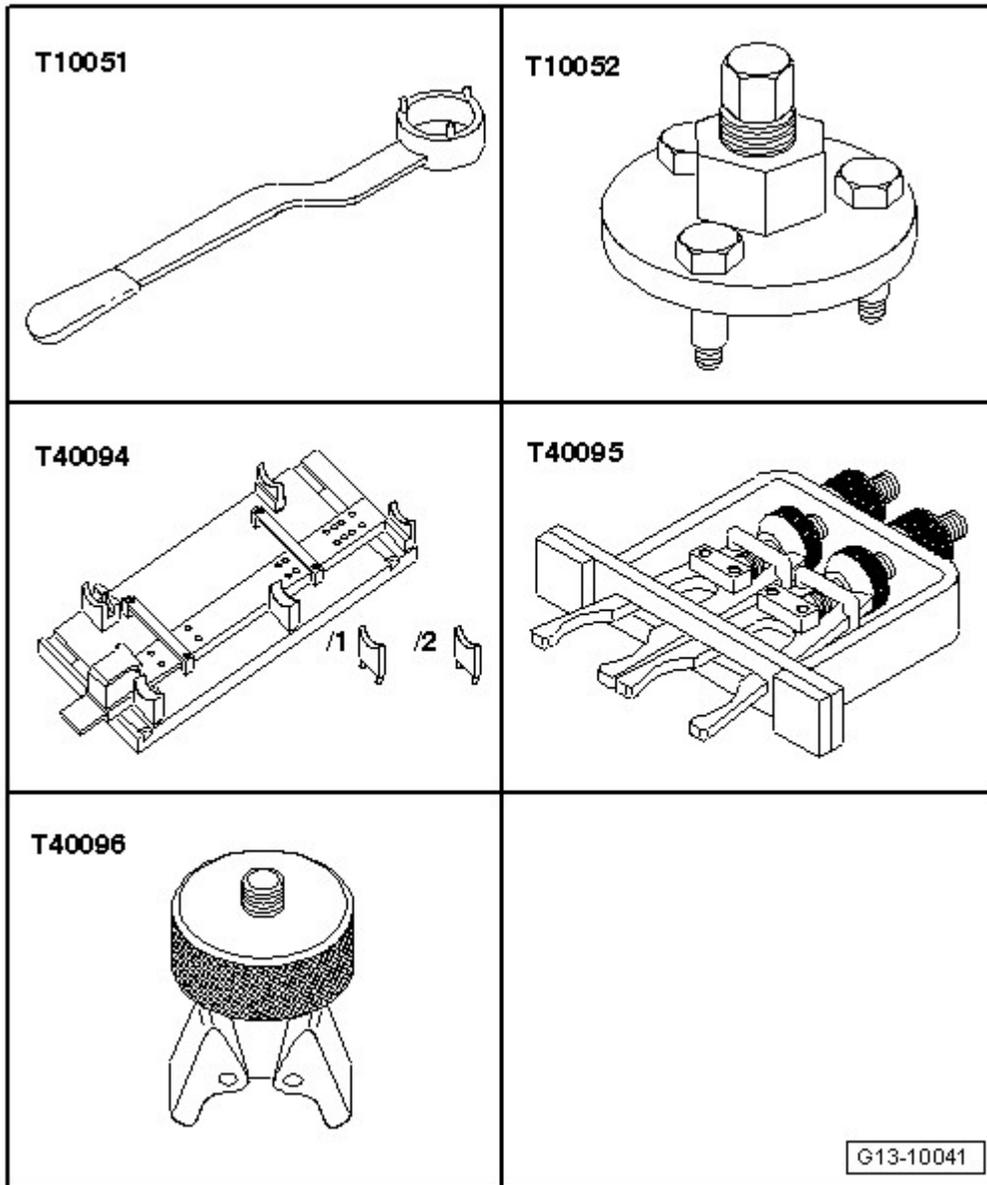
Special Tools And Workshop Equipment (2 Of 4)
